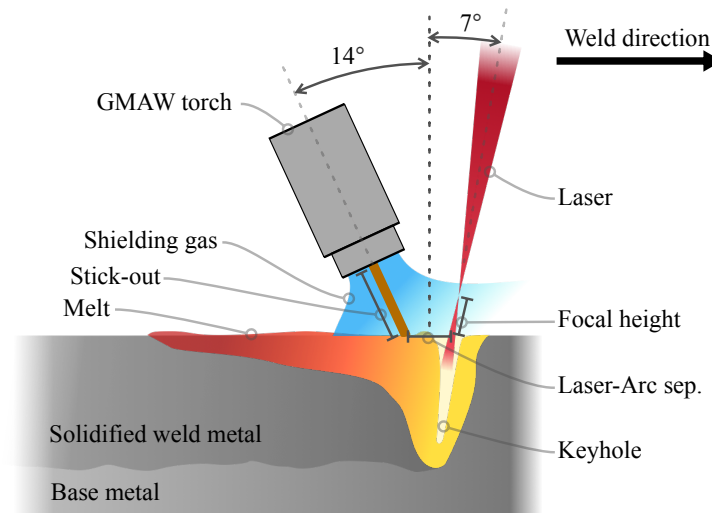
Principle schematic of the HLAW technology, where the primary procedure dimensions are outlined. The weld direction indicates the laser beam movement and arc source relative to a stationary weld sample.
